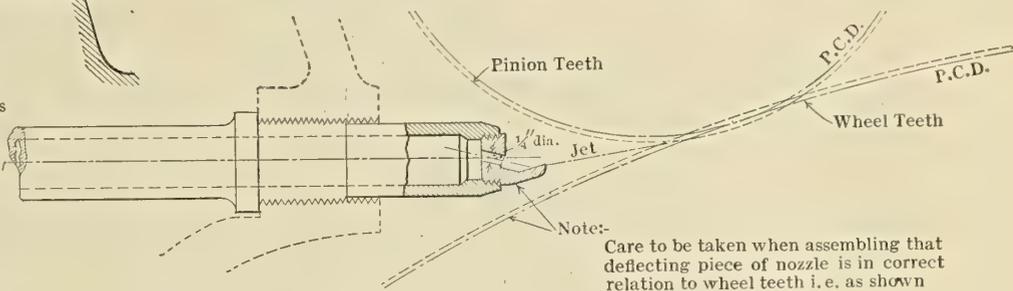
Sprayer for Lubricating Gearing Teeth
